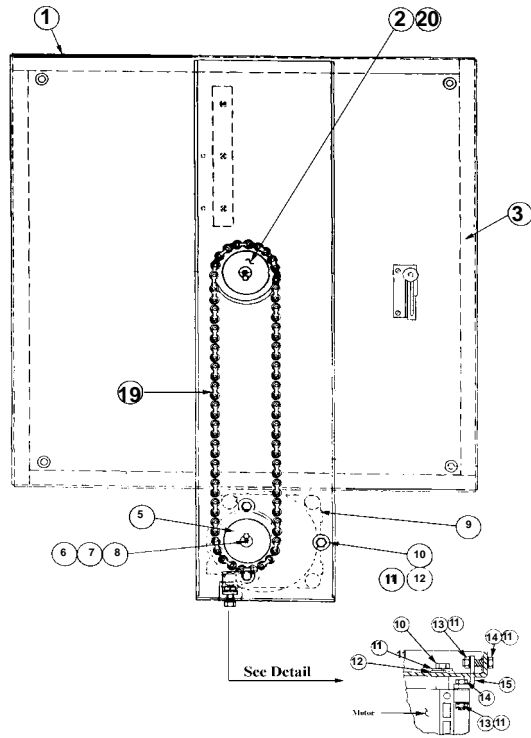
TOP VIEW ICE LEVEL CONTROL ASSEMBLY IMD 300-30 AND
